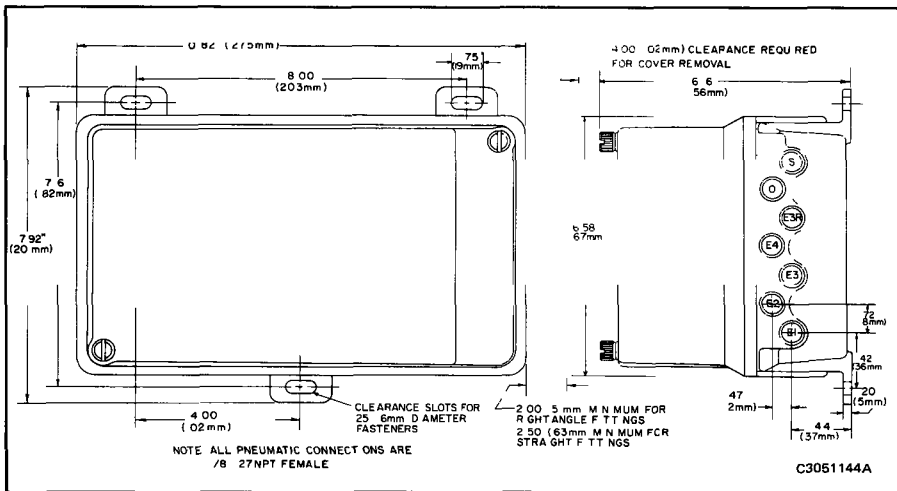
External and Mounting Dimensions, Type FG Function Generator.
